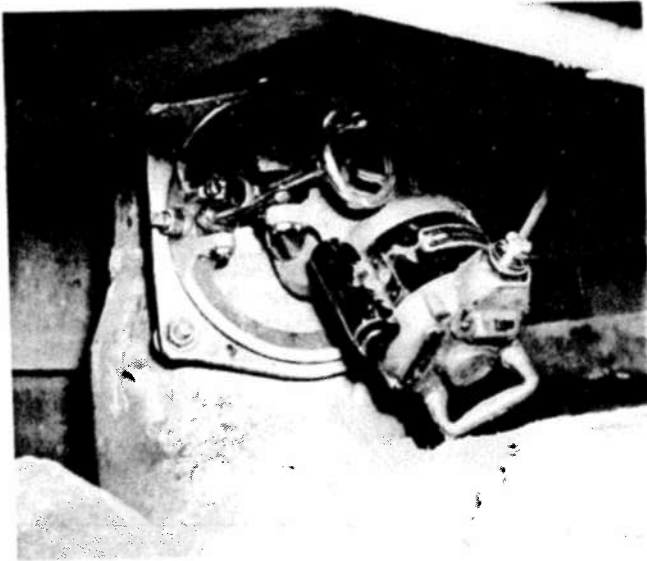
"Weld-prober" saw in operation removing boat-shaped specimen from pipe-to-valve joint.
